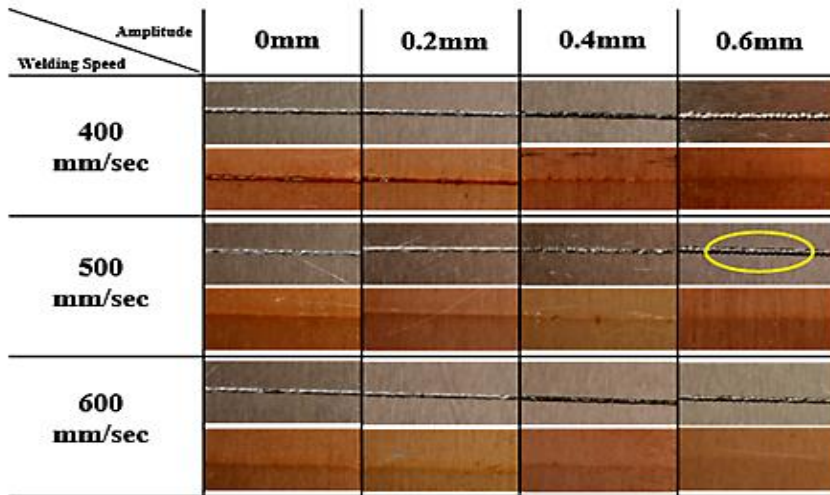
Bead profiles analysis of welded joint with various welding speeds 400~600mm/sec; bead appearance
